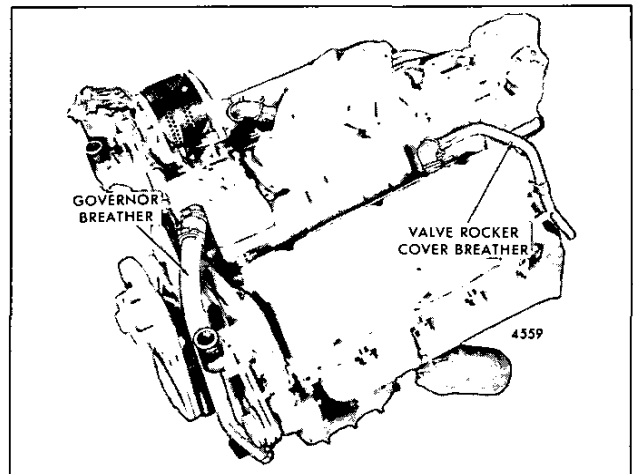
Typical Breather Mountings (8V-53 Engine)
